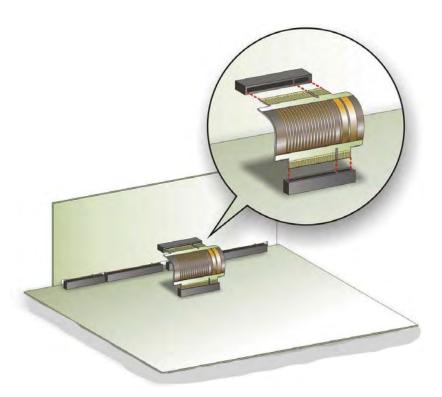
PCIe x8 Board-to-Board Connector Installation
